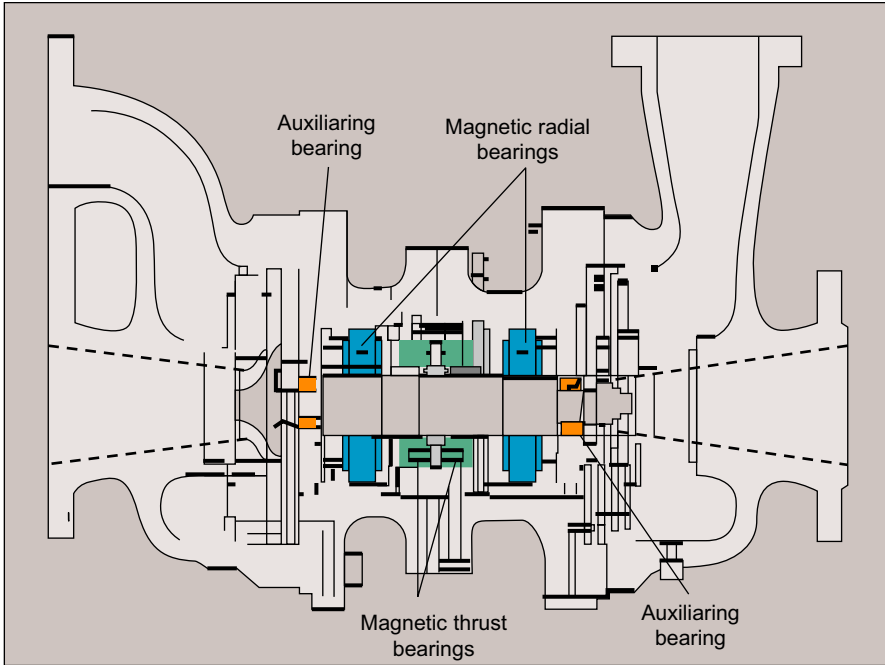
Turboexpander with magnetic bearings. (Courtesy GE Oil and Gas.)
